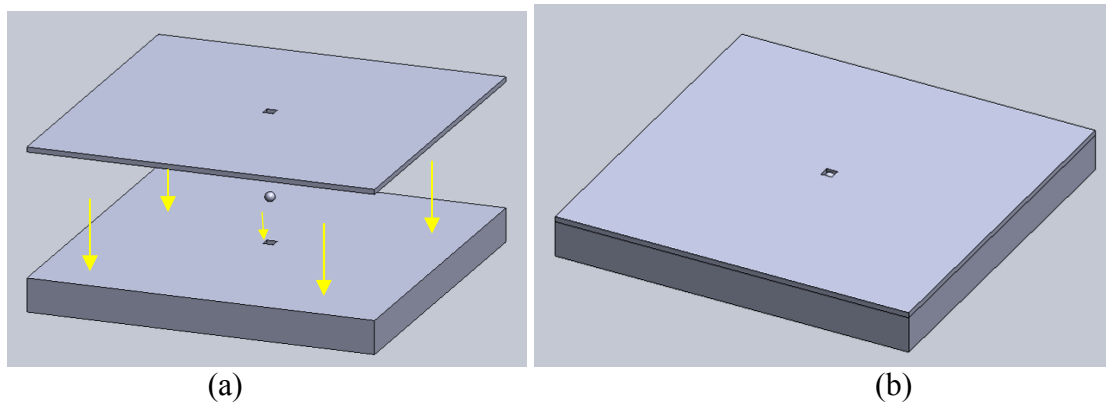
Depiction of the ball bearing alignment technique (a) exploded view (b) bonded view
